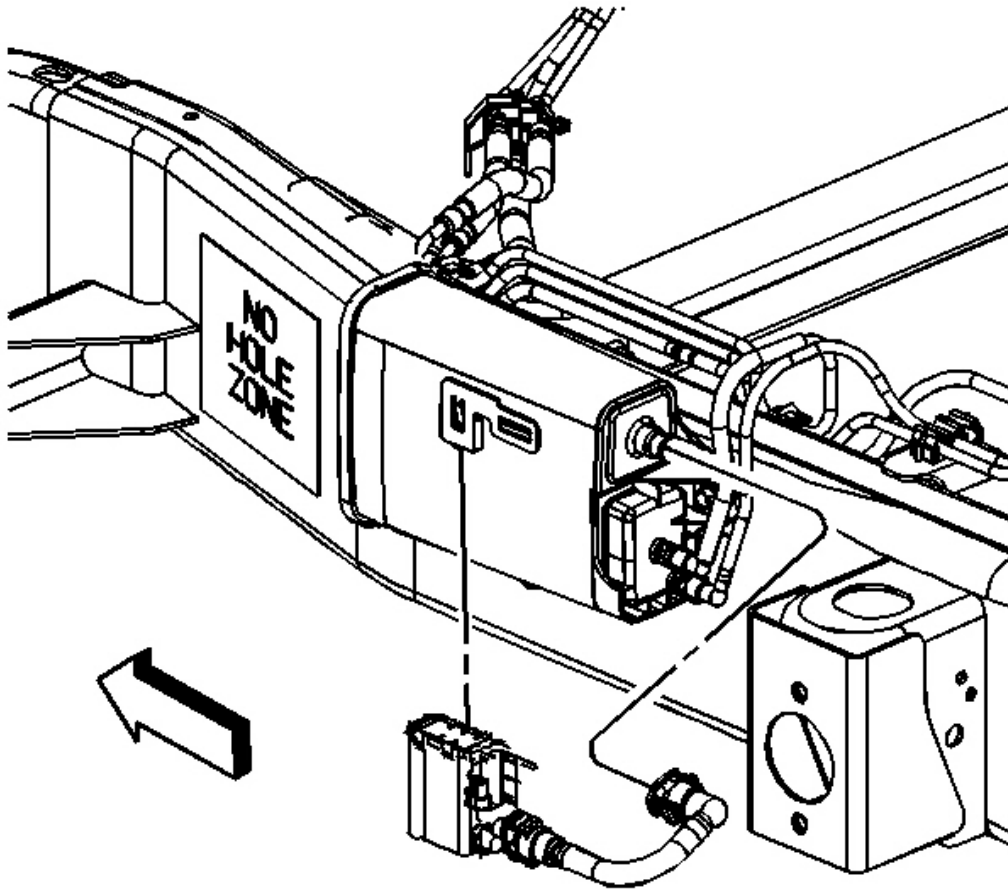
Vent Pipe & EVAP Canister Vent Valve Electrical Connector
